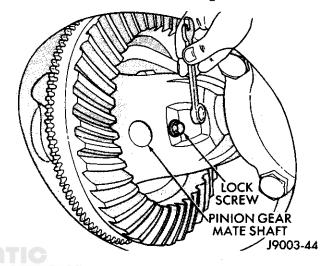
Pinion Gear Mate Shaft Lock Screw
